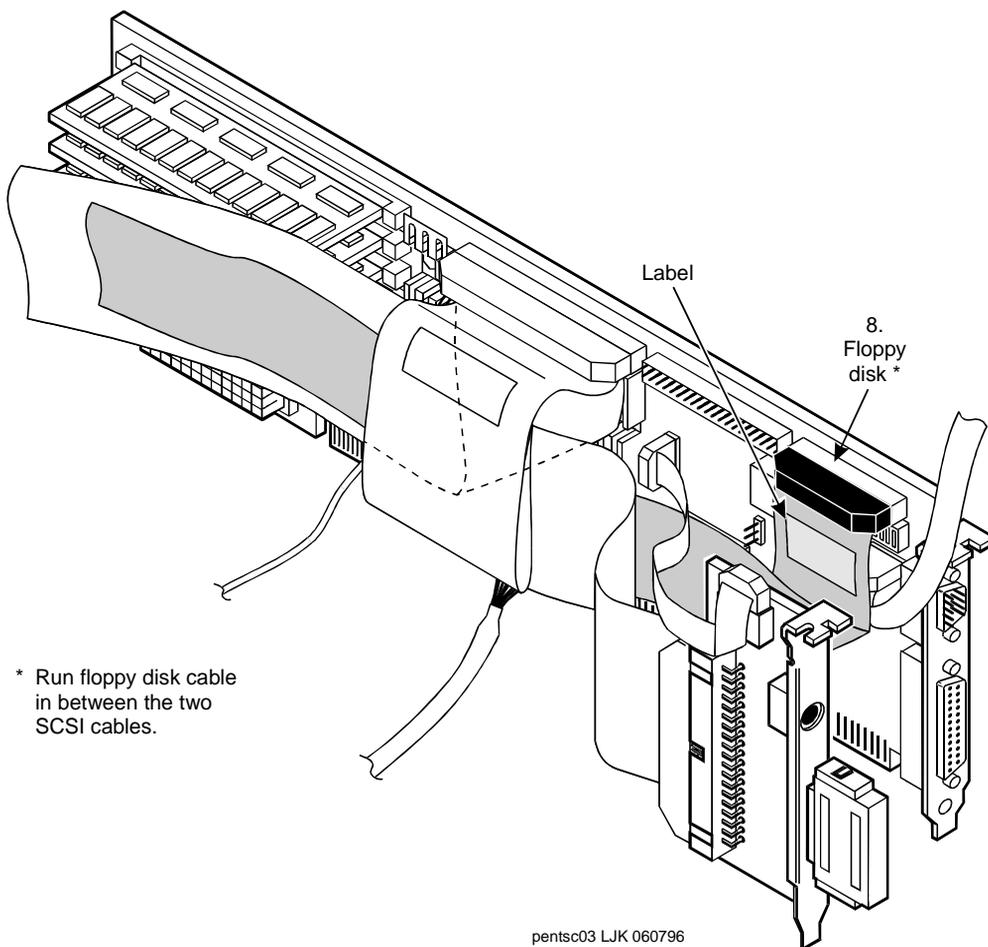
Attaching Cables to the P5 75 MHz CPU Circuit Card - Part 3
